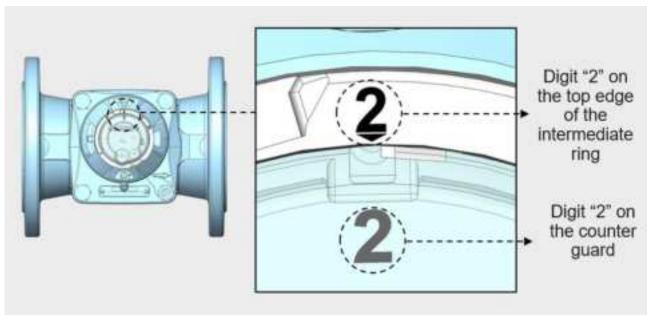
Mounting the retaining ring on the counter mechanism cover.
